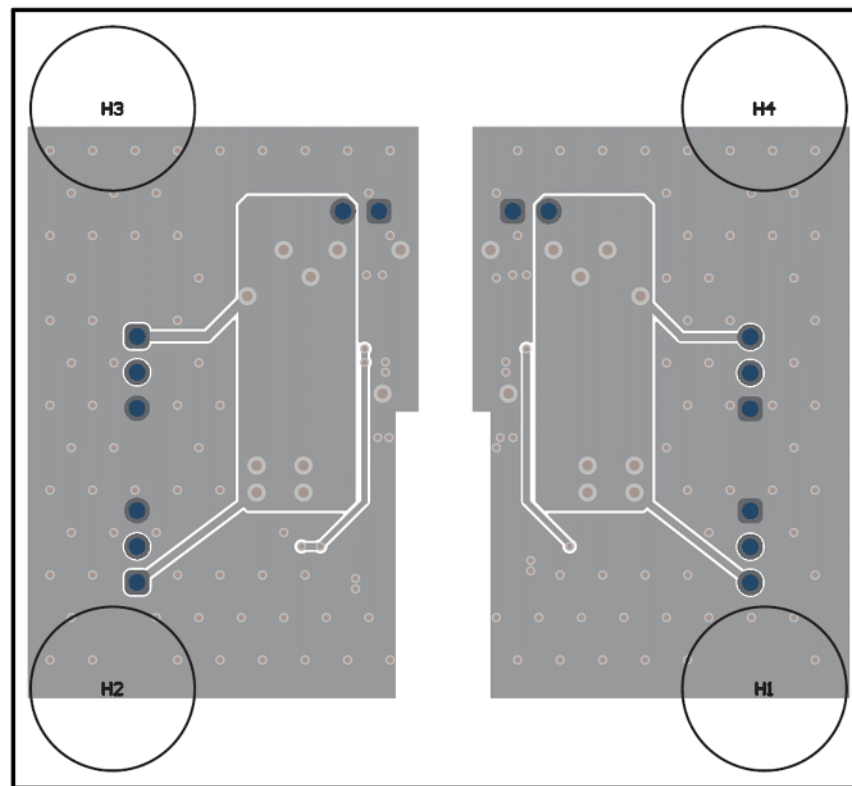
ISO1640DEVM Bottom PCB Layout
